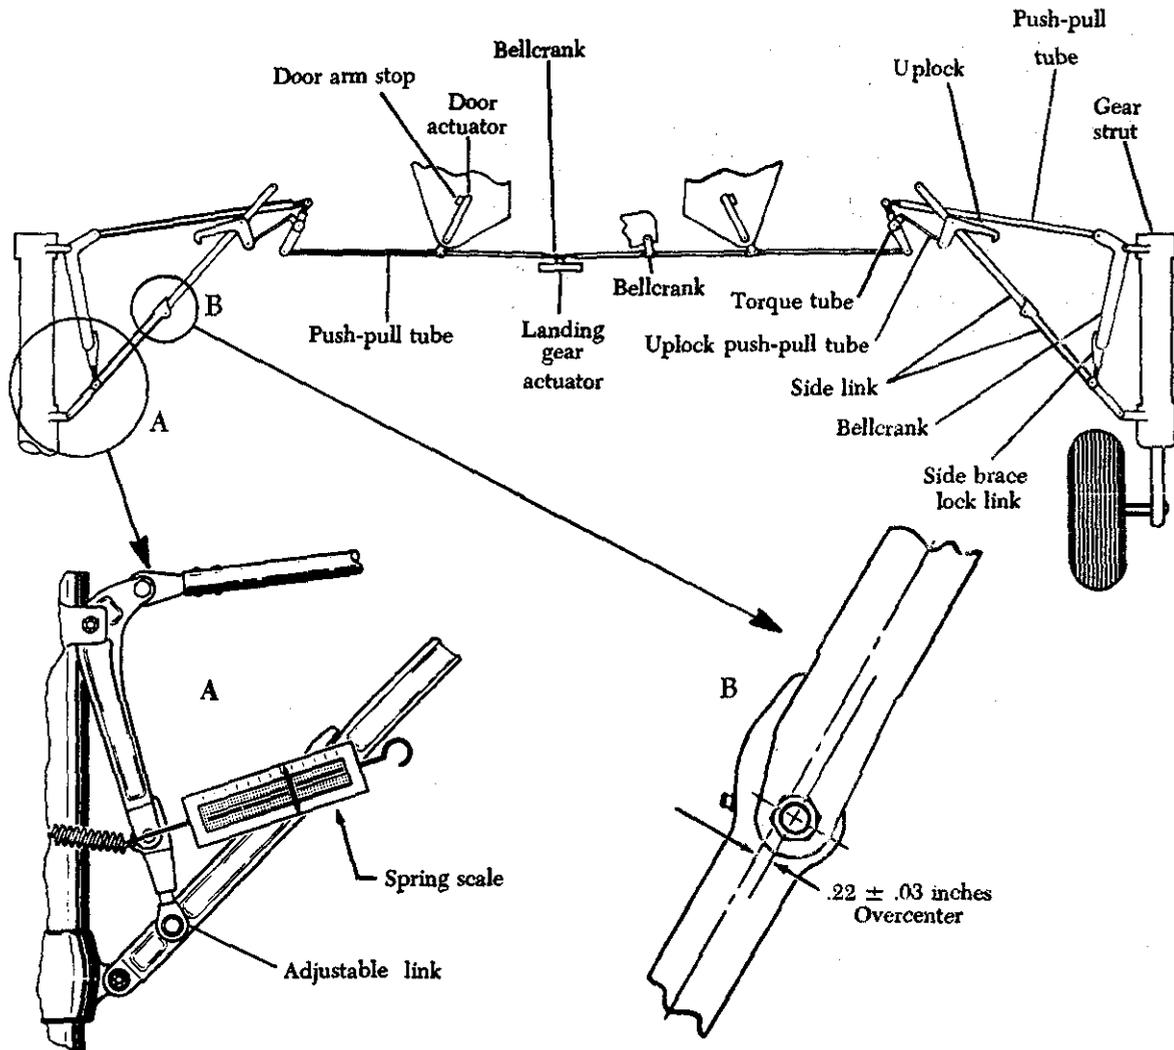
Landing gear schematic showing overcenter adjustments.
